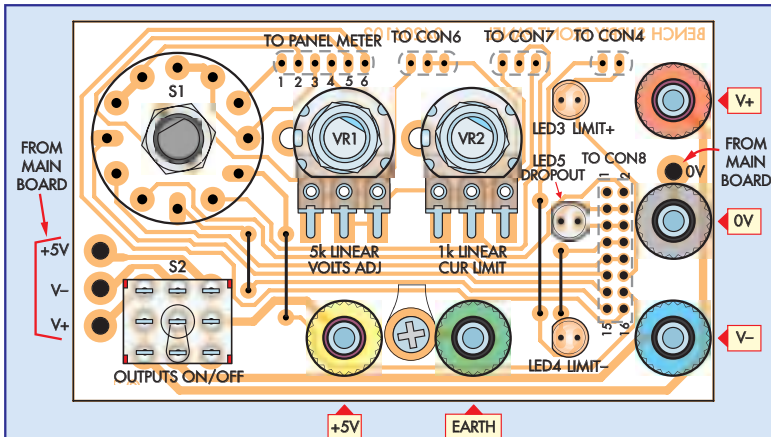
follow this layout diagram and the photograph below when building the front panel PC board. Note that the binding post terminals are soldered to the board after they have been mounted on the front panel.
